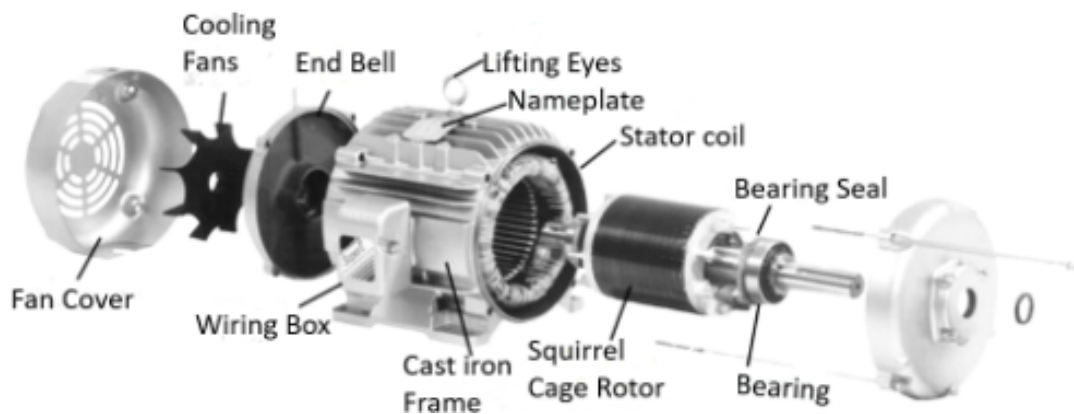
Various Parts of Squirrel Cage Induction Machines from [4]
